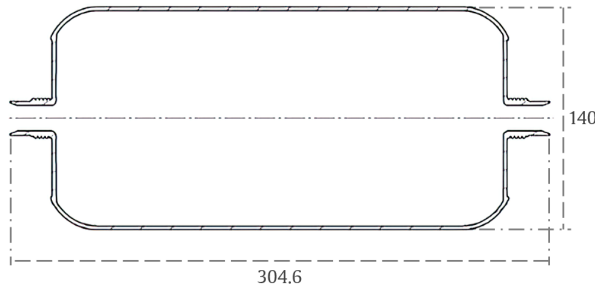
Schematic view of the vessel’s liner and liner dimensions. Dimensions in mm.
